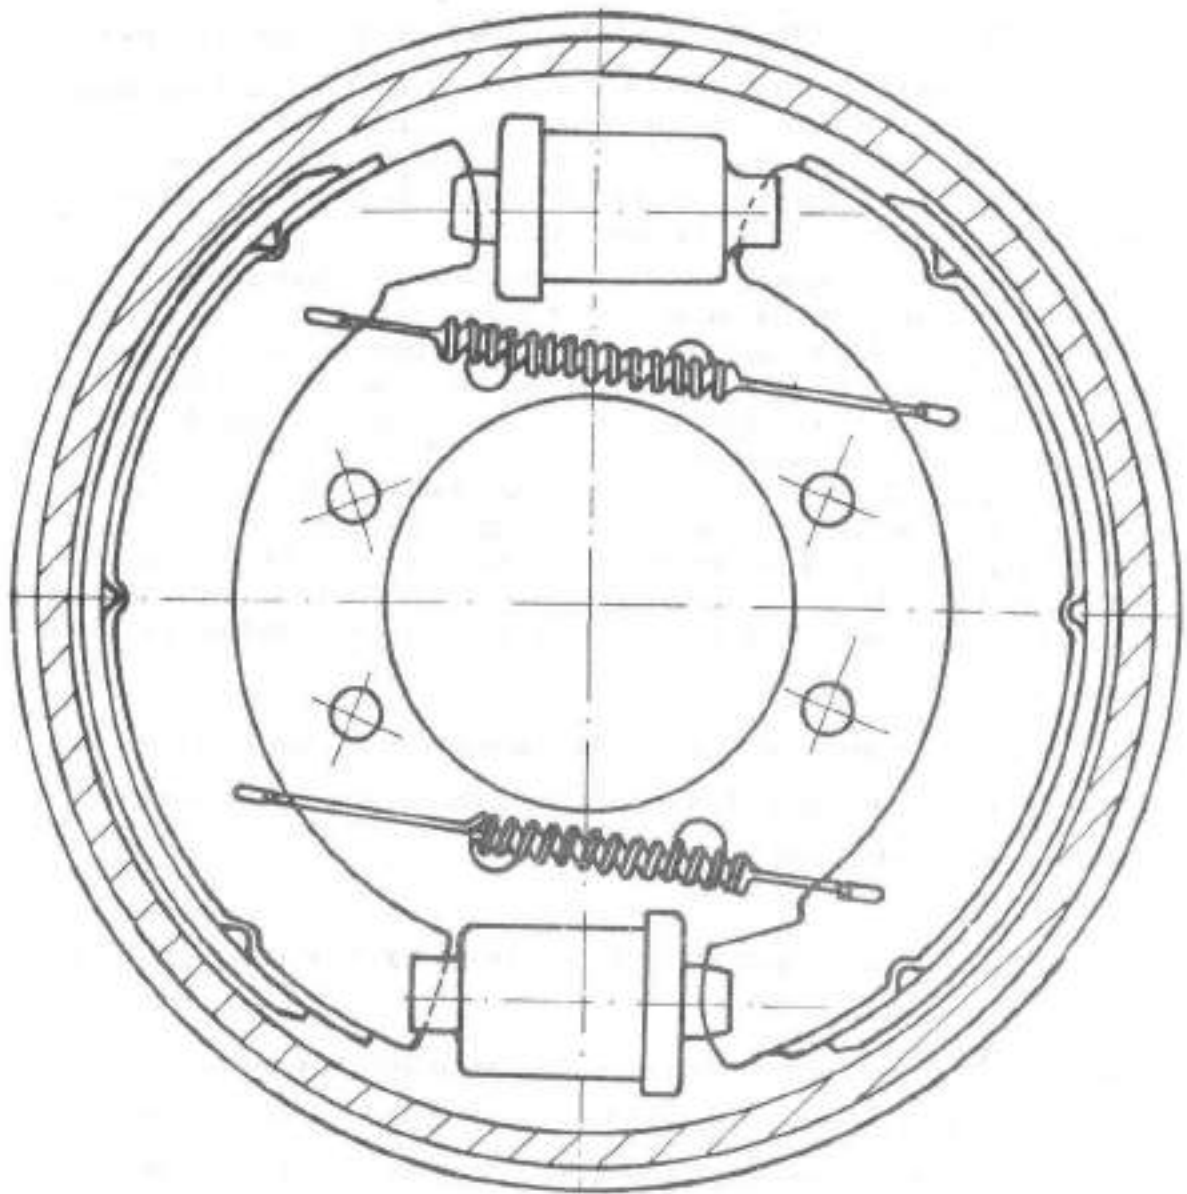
40. FRONT WHEEL BRAKE ANCHOR PLATE
